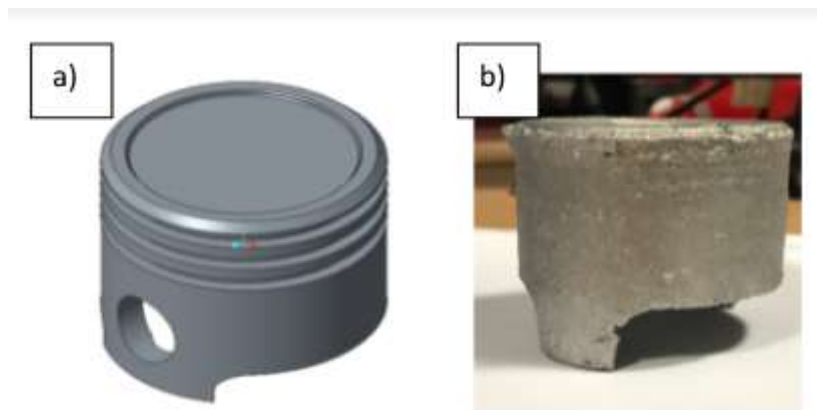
Design of the piston head a) 3d Design b) Fabricated Piston head
